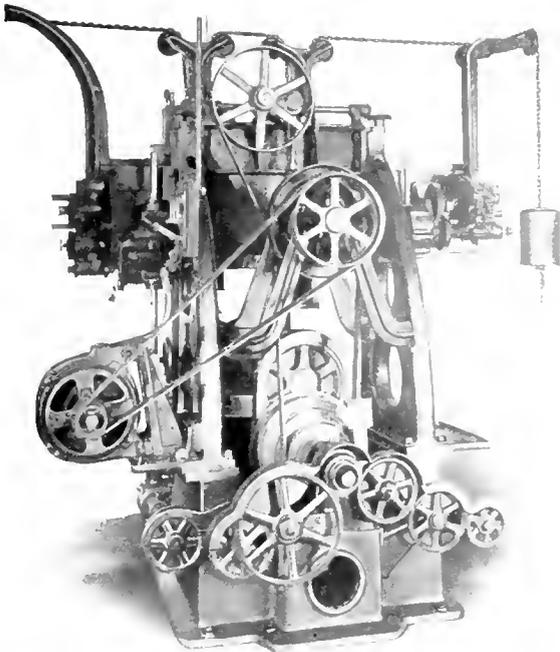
Induction Motor driving Bullard 42 inch Boring Mill
